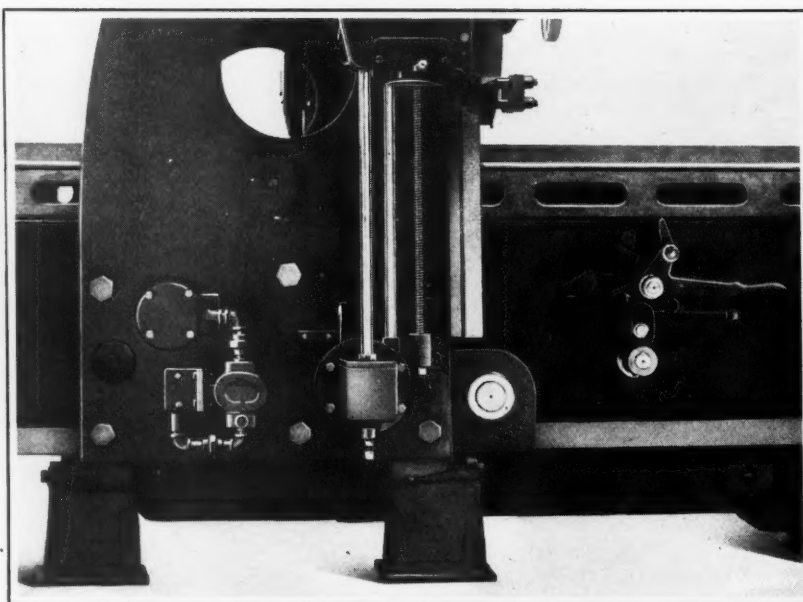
View of Left-hand Side of Machine, showing Lubricating Pump and Filter
